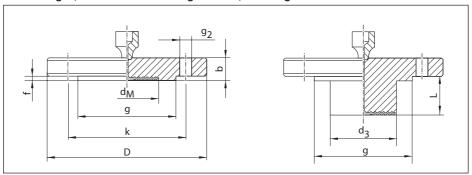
Process fitting VEGADIF 85 with single-sided chemical seal, plus side ASME flange with and without extension, 316/316L
